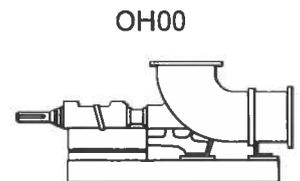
Overhung impeller – flexibly coupled – single stage – axial flow – horizontal
